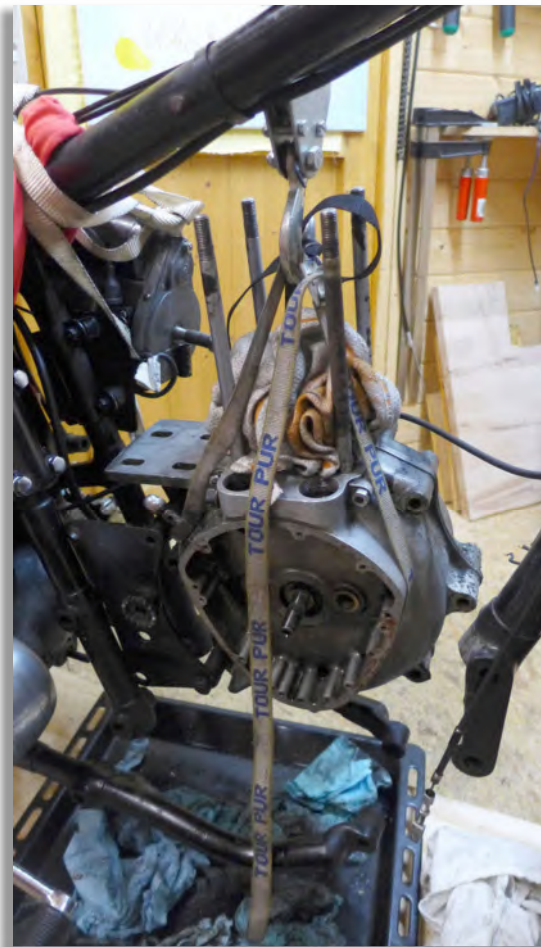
The lower carrier bolt is blocked by the frame. The two rear carrier plates cannot be dismantled.
